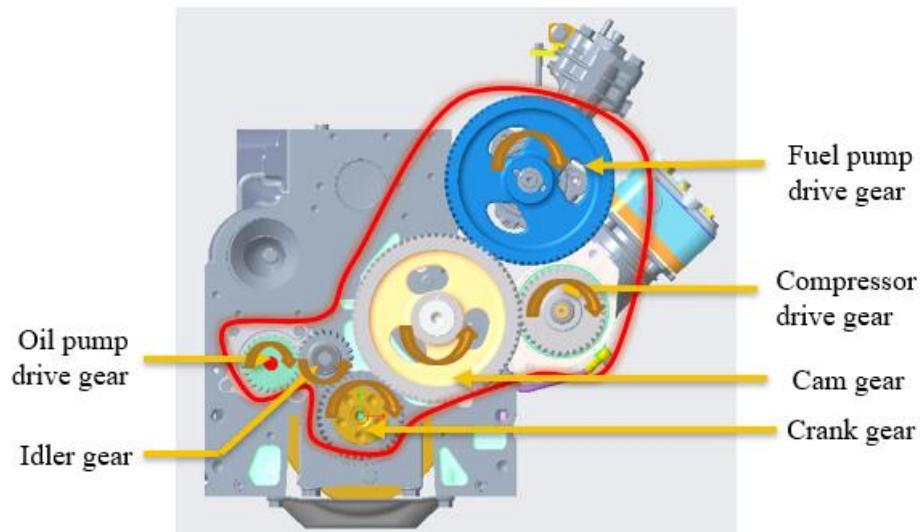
Layout of the engine gear train and the rotation direction of each gear
